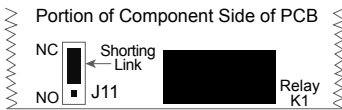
(a) Jumper J11 on the PCB in "NC" position
